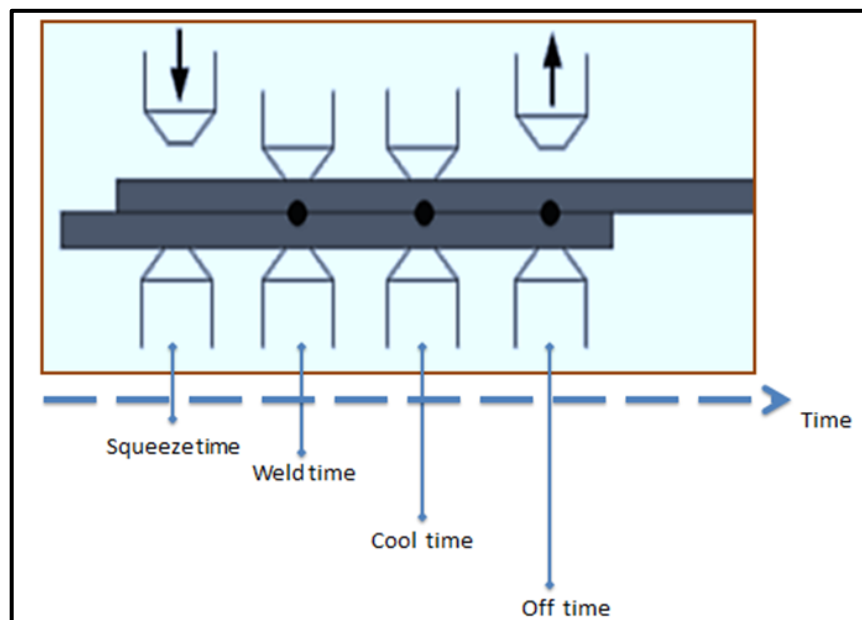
Typical welding sequence, (Matsukage, Sakurai, Traui, & Iyota, 2023)
